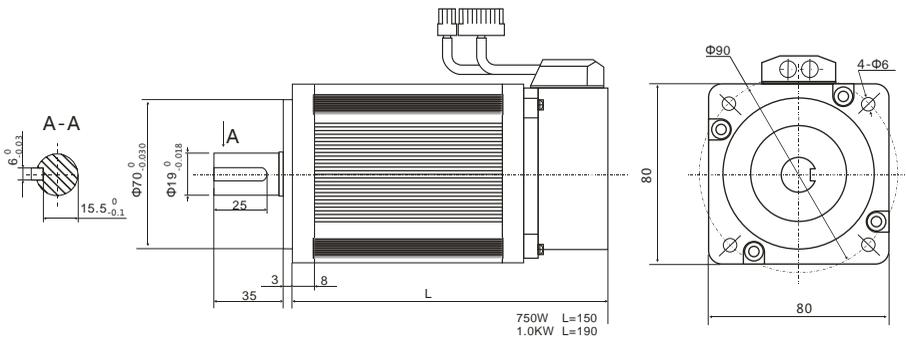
750W/1KW (Low inertia) type Motor installation dimension (Unit: mm)
